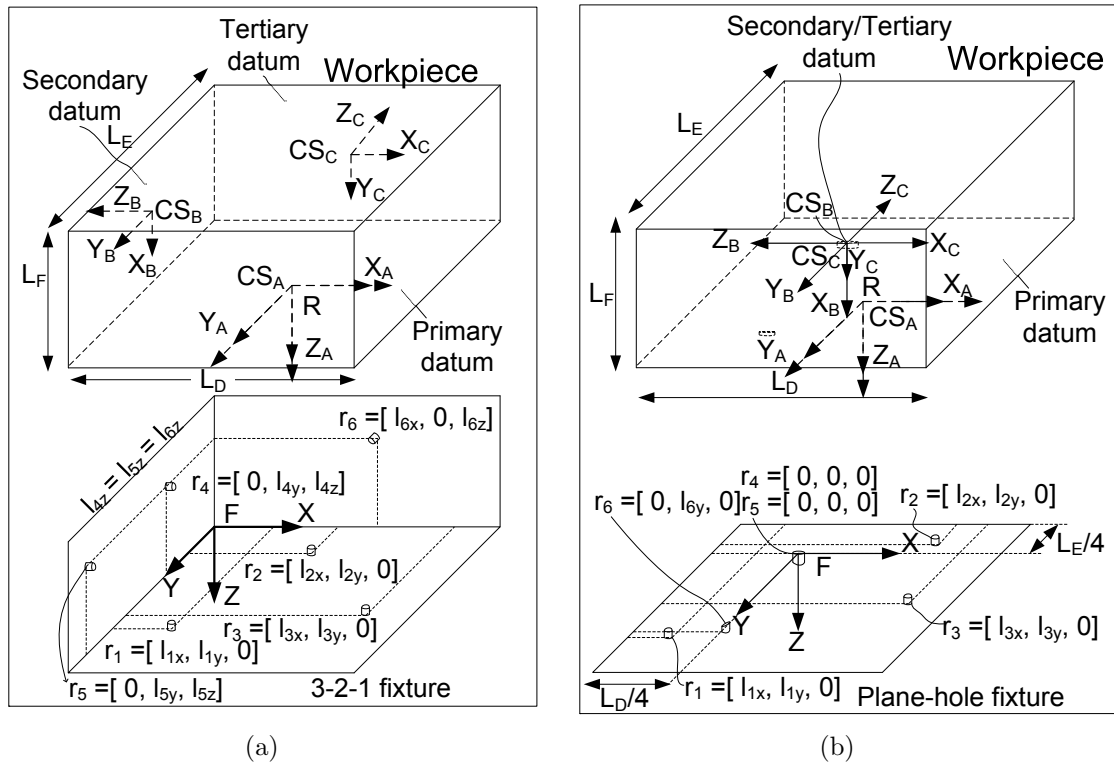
A generic fixture layout based on locators with a) a 3-2-1 locating scheme, and b) a plane-hole locating scheme.
